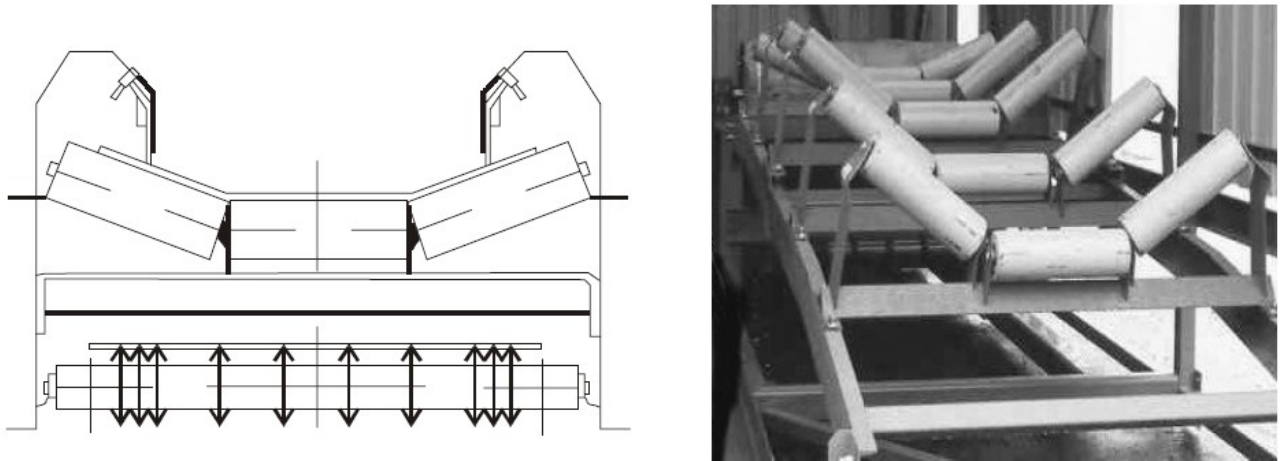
Three roll idler : Sketch shows three roll carrying idler with straight return idler in same frame, and photograph shows set of assembled idlers
